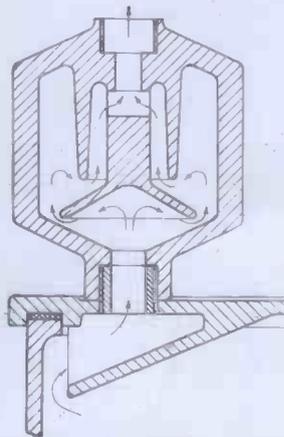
Diagram of spray arrestor for mechanical rotary pump.
